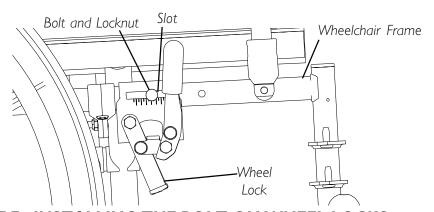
INSTALLING THE BOLT-ON WHEEL LOCKS
